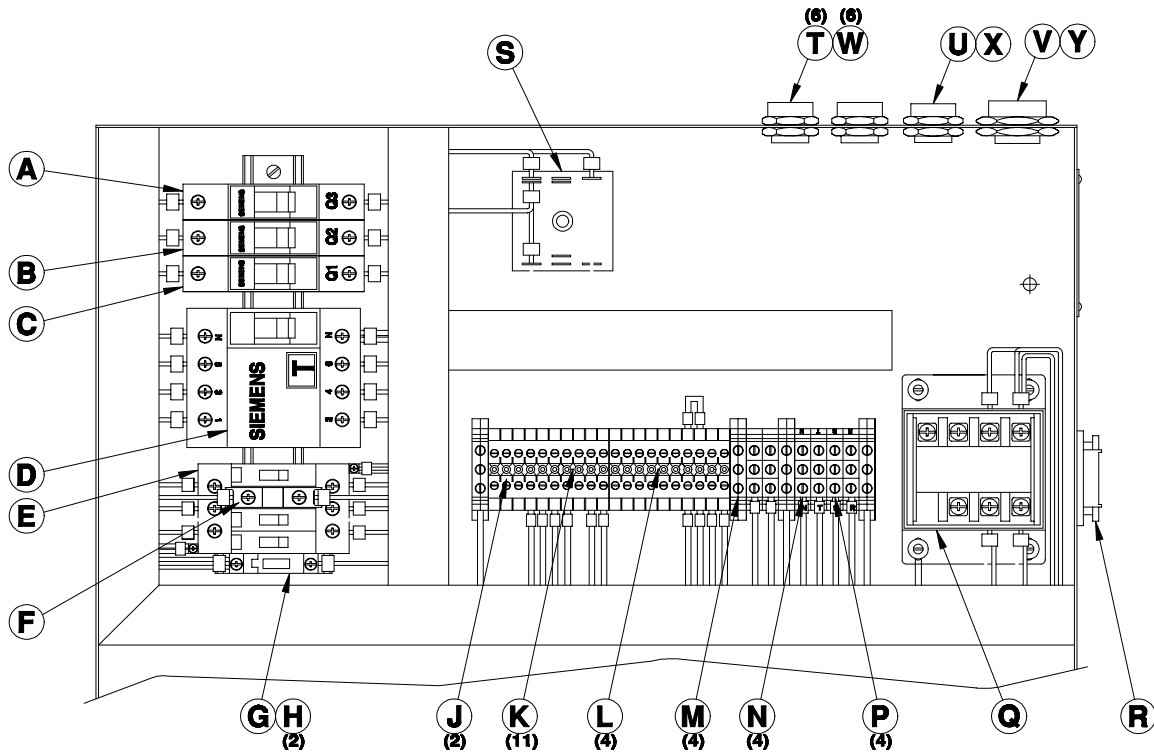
Electrical Console (Part No. 030-00004-000), Sheet 2 of 2
